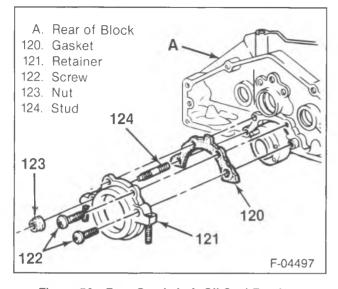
Rear Crankshaft Oil Seal Retainer (5.0L and 5.7L Engines)
